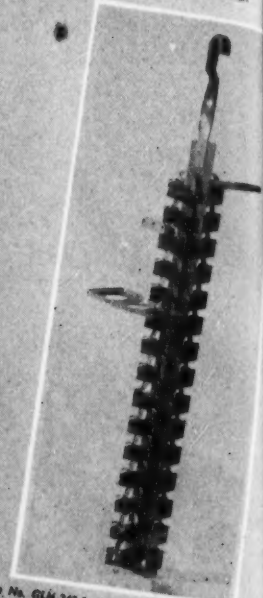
Overall length 5' 0" distance from spine to outside of contact is 3". Suitable for a large variety of small parts. Two fixtures may be used together to anodize parts of small diameter or extrusions or the like. The fixture shown has 20 contacts (10 on either side of the spine). Handles have 90° twist so that long pieces are held lengthwise in the racks.
